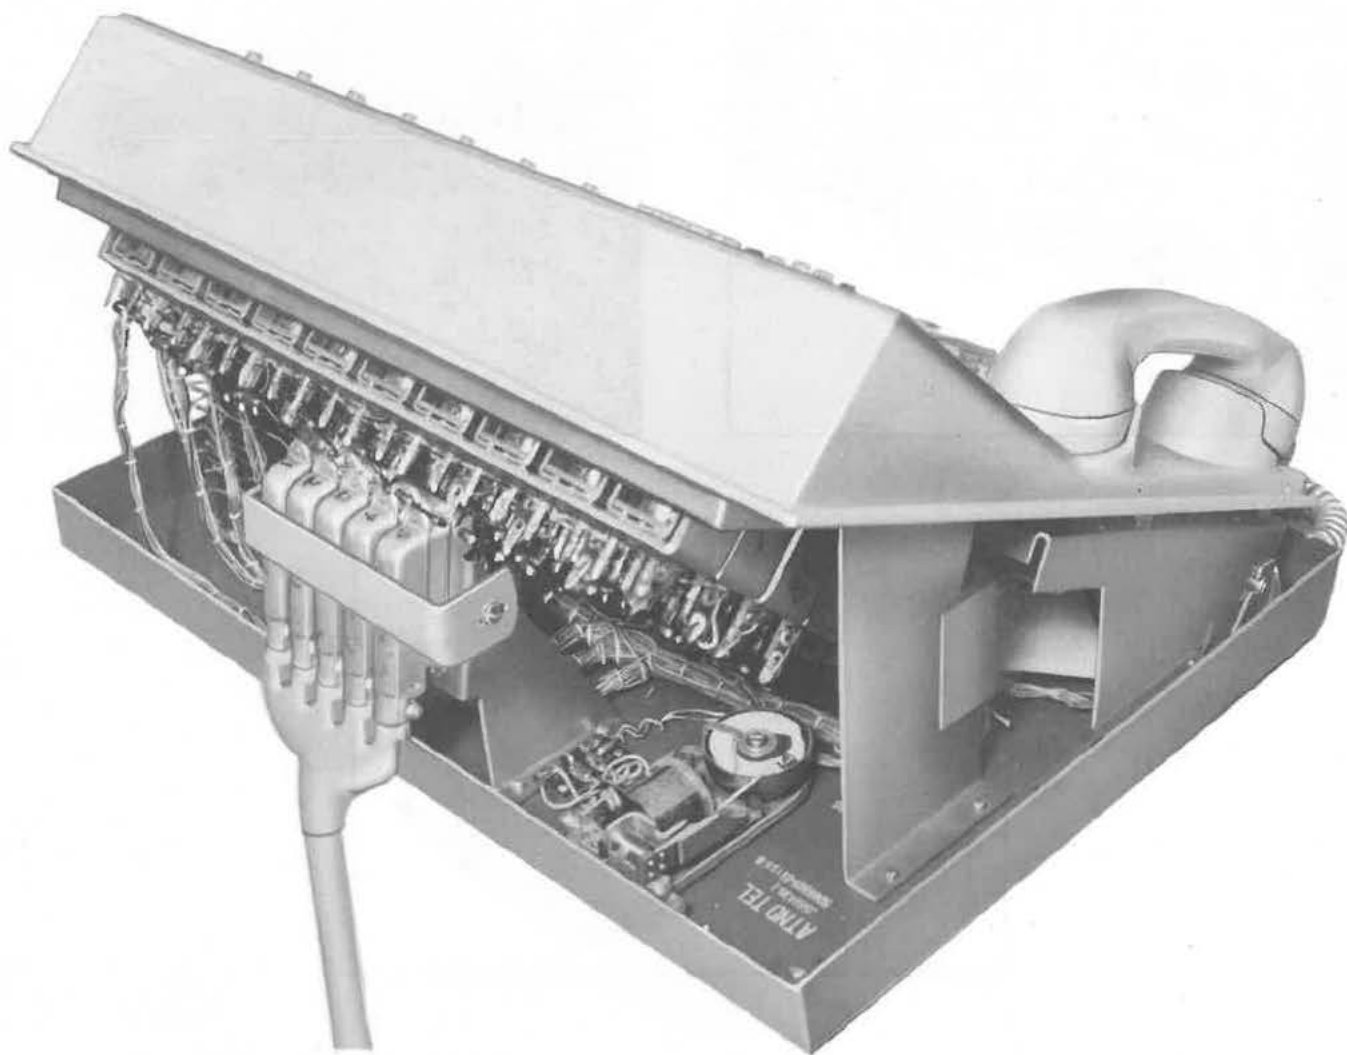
Rear View of Console Showing Cable Connector Properly Positioned—Less Spacer
